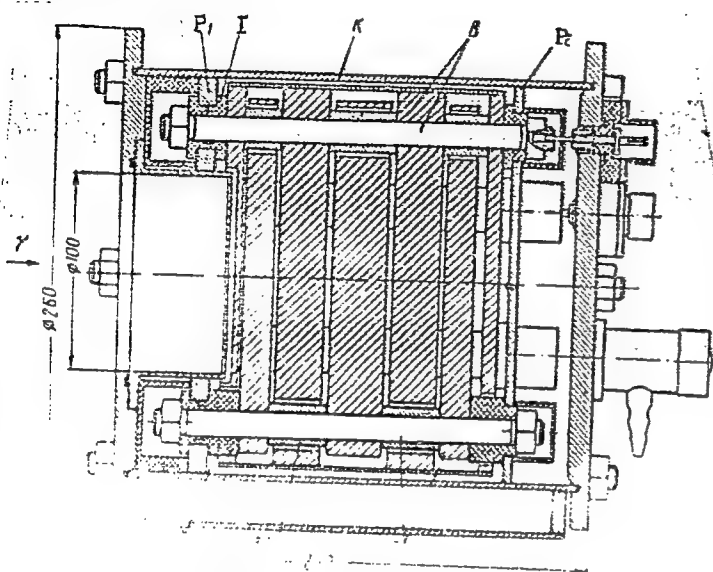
Construction of new quantum meter. B -- high voltage electrodes; C -- gathering electrodes; BT -- spacer bushings; I -- insulators; K -- outer jacket; P₁, P₂ -- front and back panels of the quantum meter.
